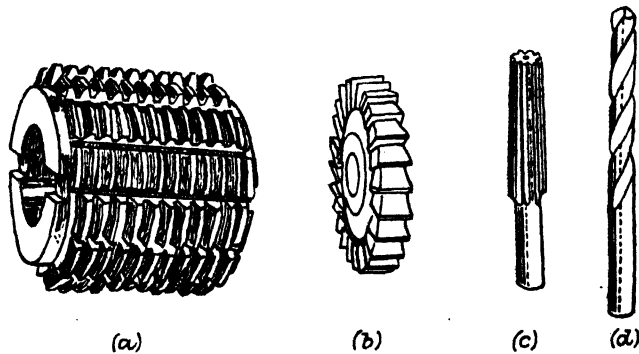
Standard cutters. (a) Gear hob. (b) Milling cutter. (c) Taper reamer. (d) Twist drill.
